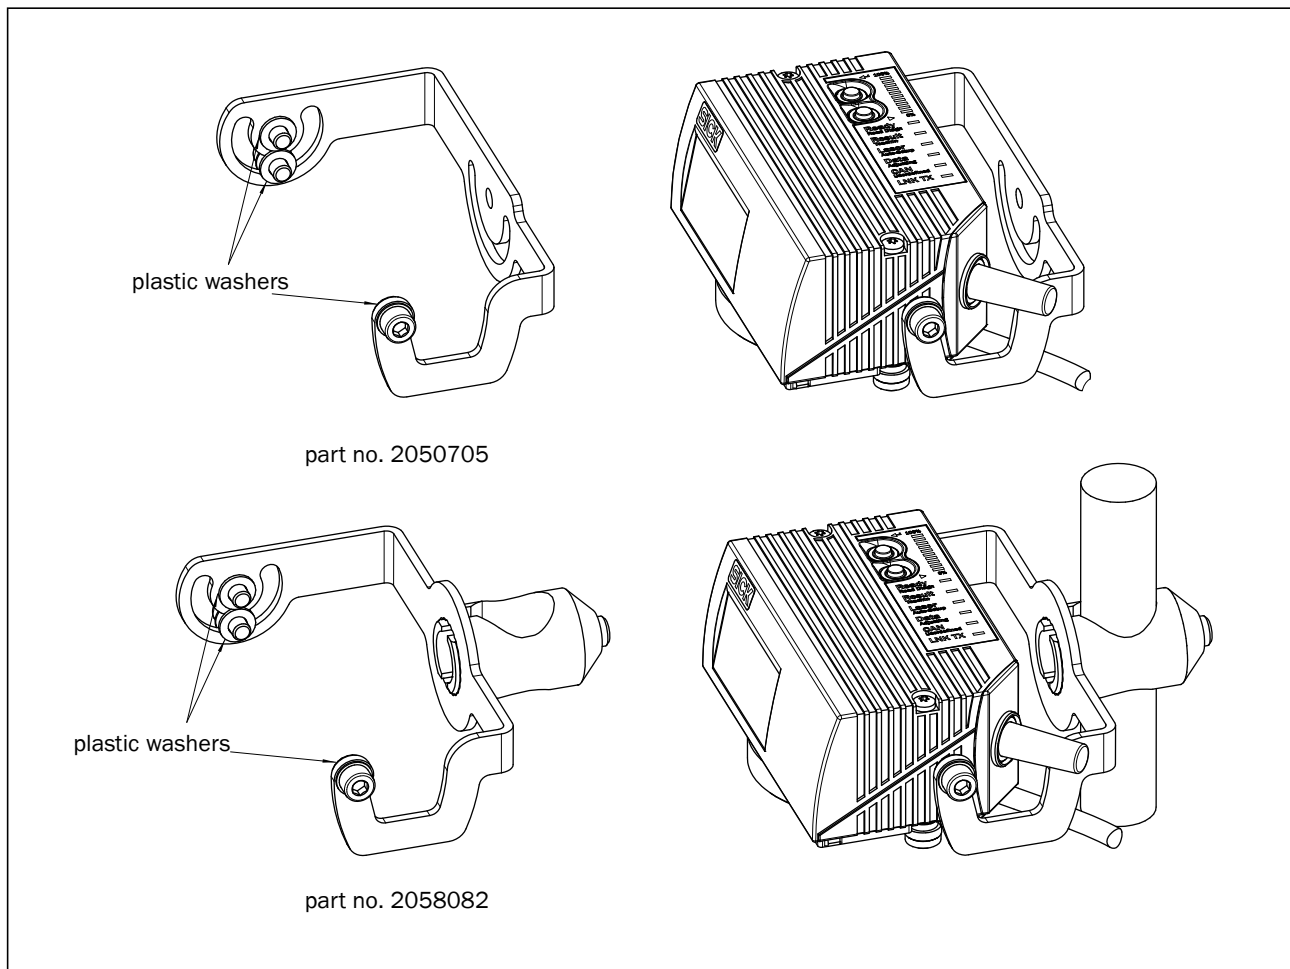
Fitting the CLV63x to 65x bar code scanner on the mounting bracket
